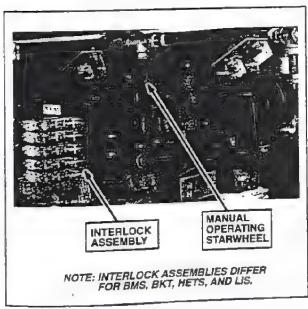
POWER SWITCH FRONT END ASSEMBLY. E-42752.
